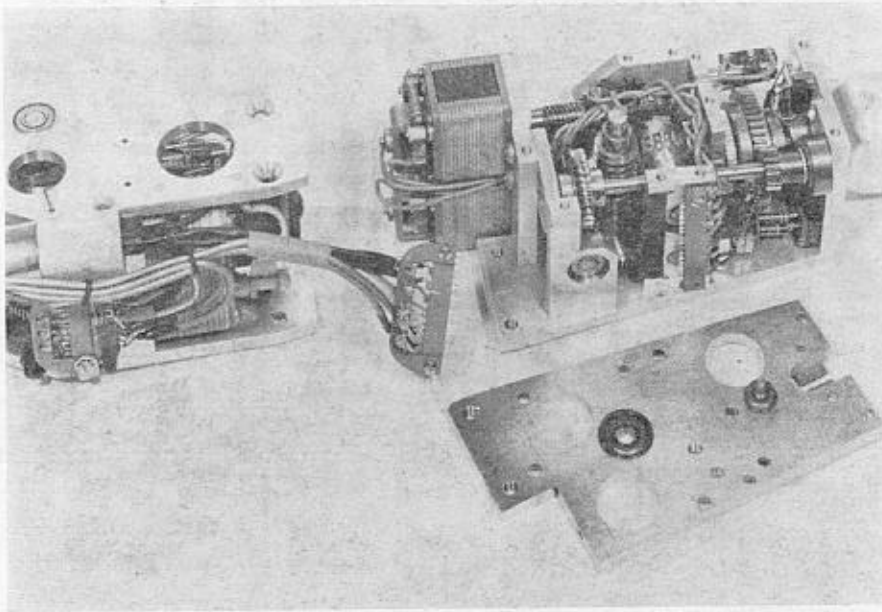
Engineering model multiple axis prosthetic arm shown partially disassembled
